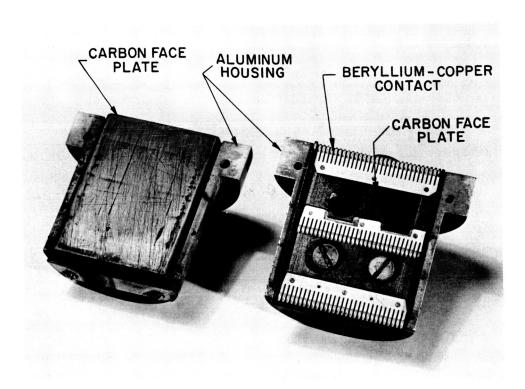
A DISASSEMBLED, MULTIPLE POINT ELECTRODE CONTACT
